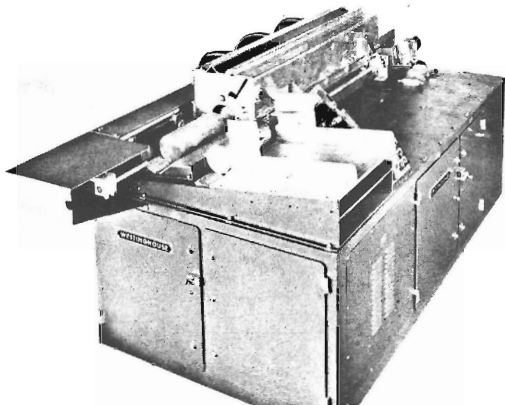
60-cycle aluminum through-heating at 5,000 lb per hr to 950°F by an 800-kw billet heater. (*Westinghouse Electric Corp.*)
